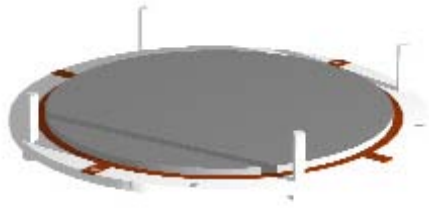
side view assembly step 1-3. Example is for chevron configuration
